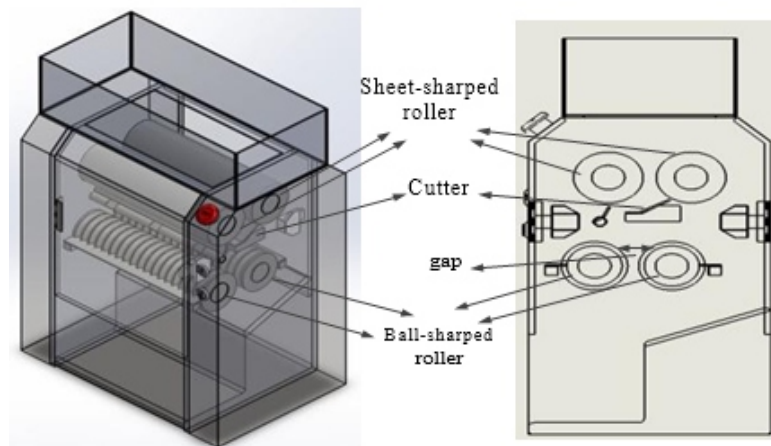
Configuration of Automatic Ball-Shaped Tapioca Pearls Forming Machine
